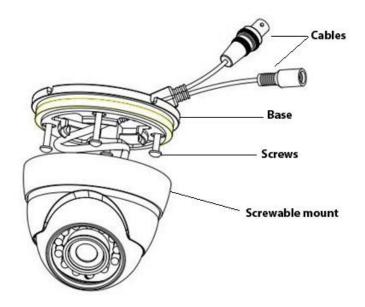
GEODOME – LE 337HD Installation and connectors
